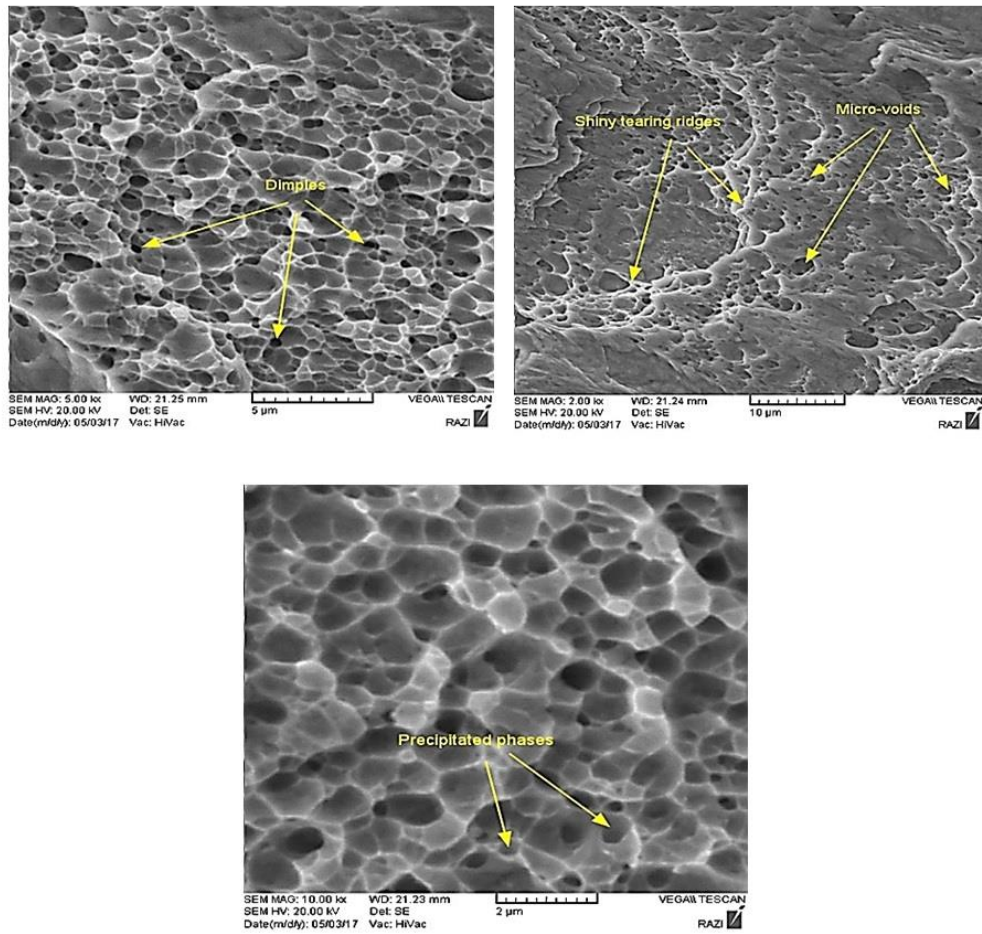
Fracture surface of the laser welded sample with low heat input.
